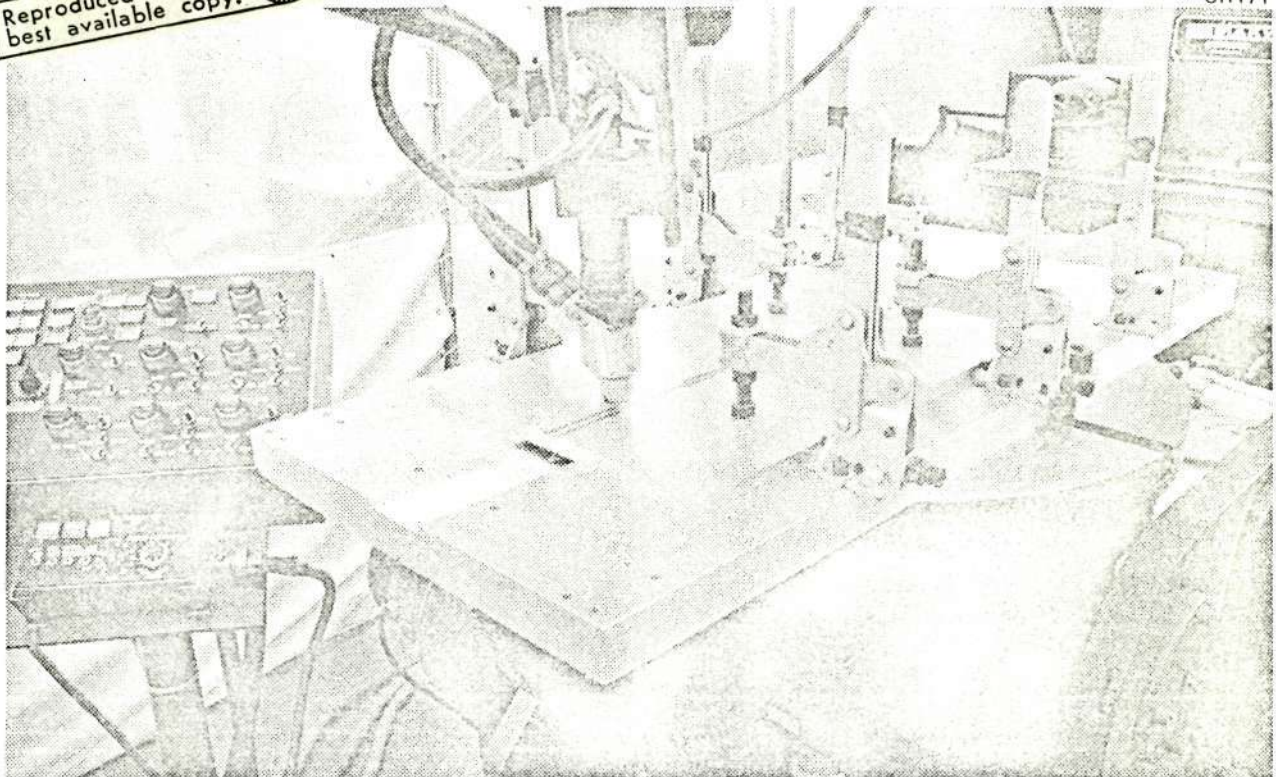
Welding Arrangement for Test Panels with Tapered Lack of Penetration
